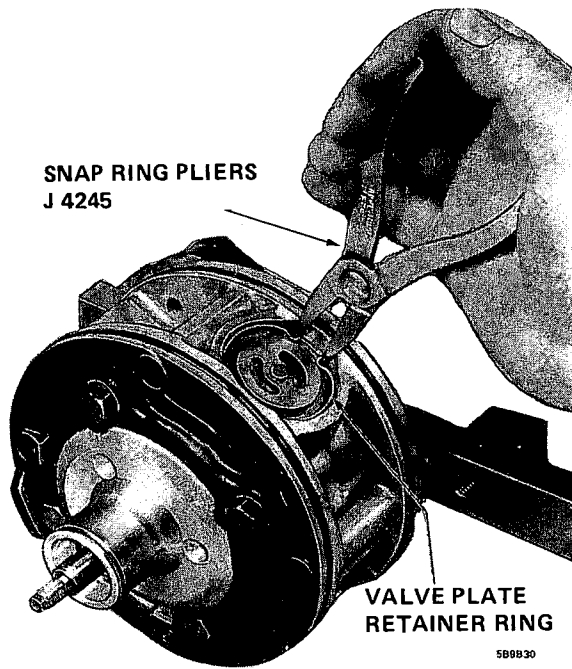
B-55 - Removing Valve Plate Retainer Ring - 4 Cylinder Compressor
